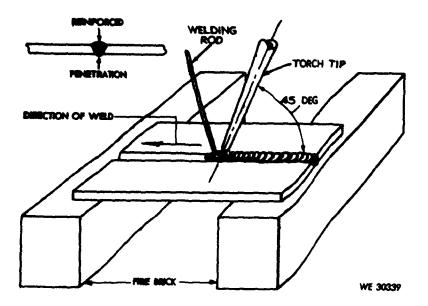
Position of rod and torch for a butt weld in a flat position.
